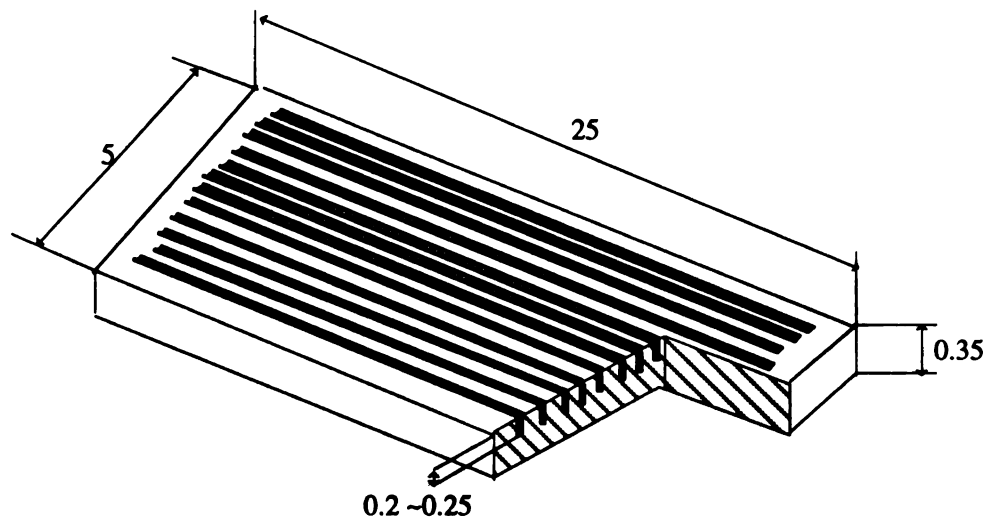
Schematic of cutting tool for NiAl diffusion bond assembly plates.
